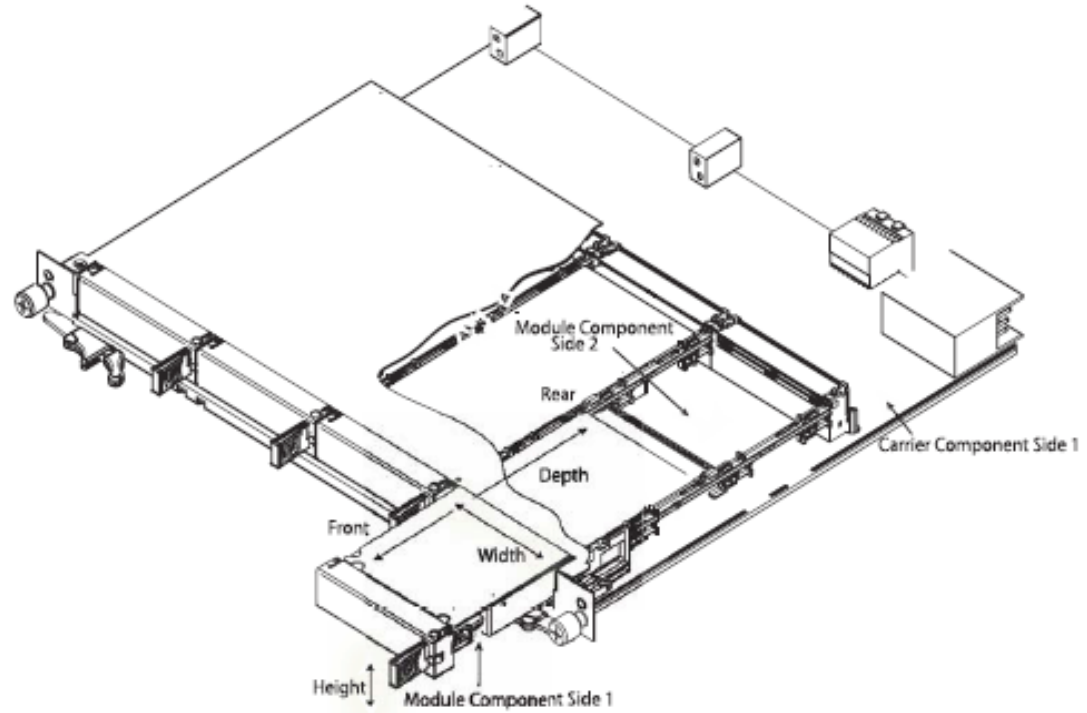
Inserting the AMC Astek Host Adapter on a carrier card
